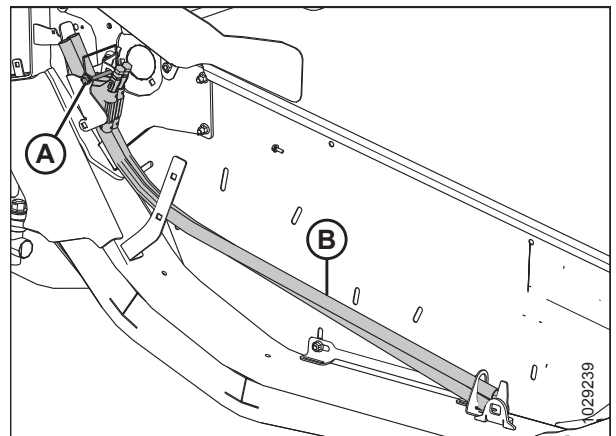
Divider Rods in Storage Location at Right Header Endsheet
